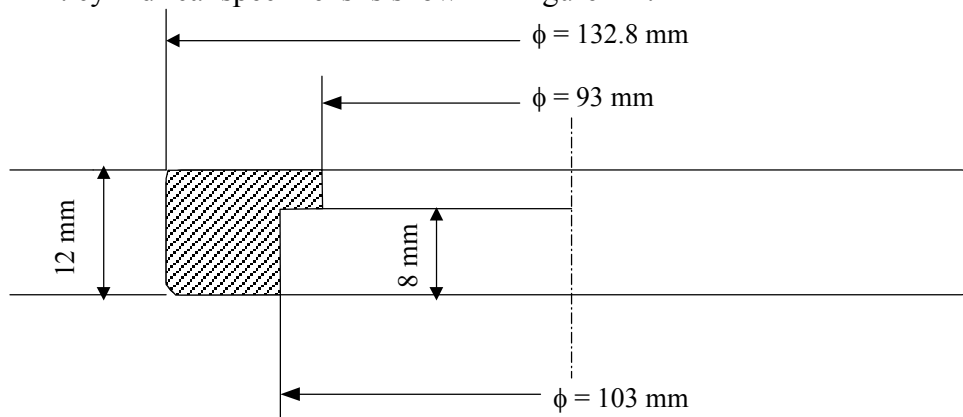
Connecting ring for 4-in specimen (96-103 mm)
